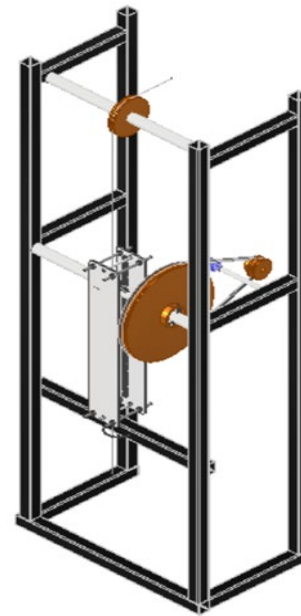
Gym equipment with chain sprocket mechanism (bicep/ triceps machine)
